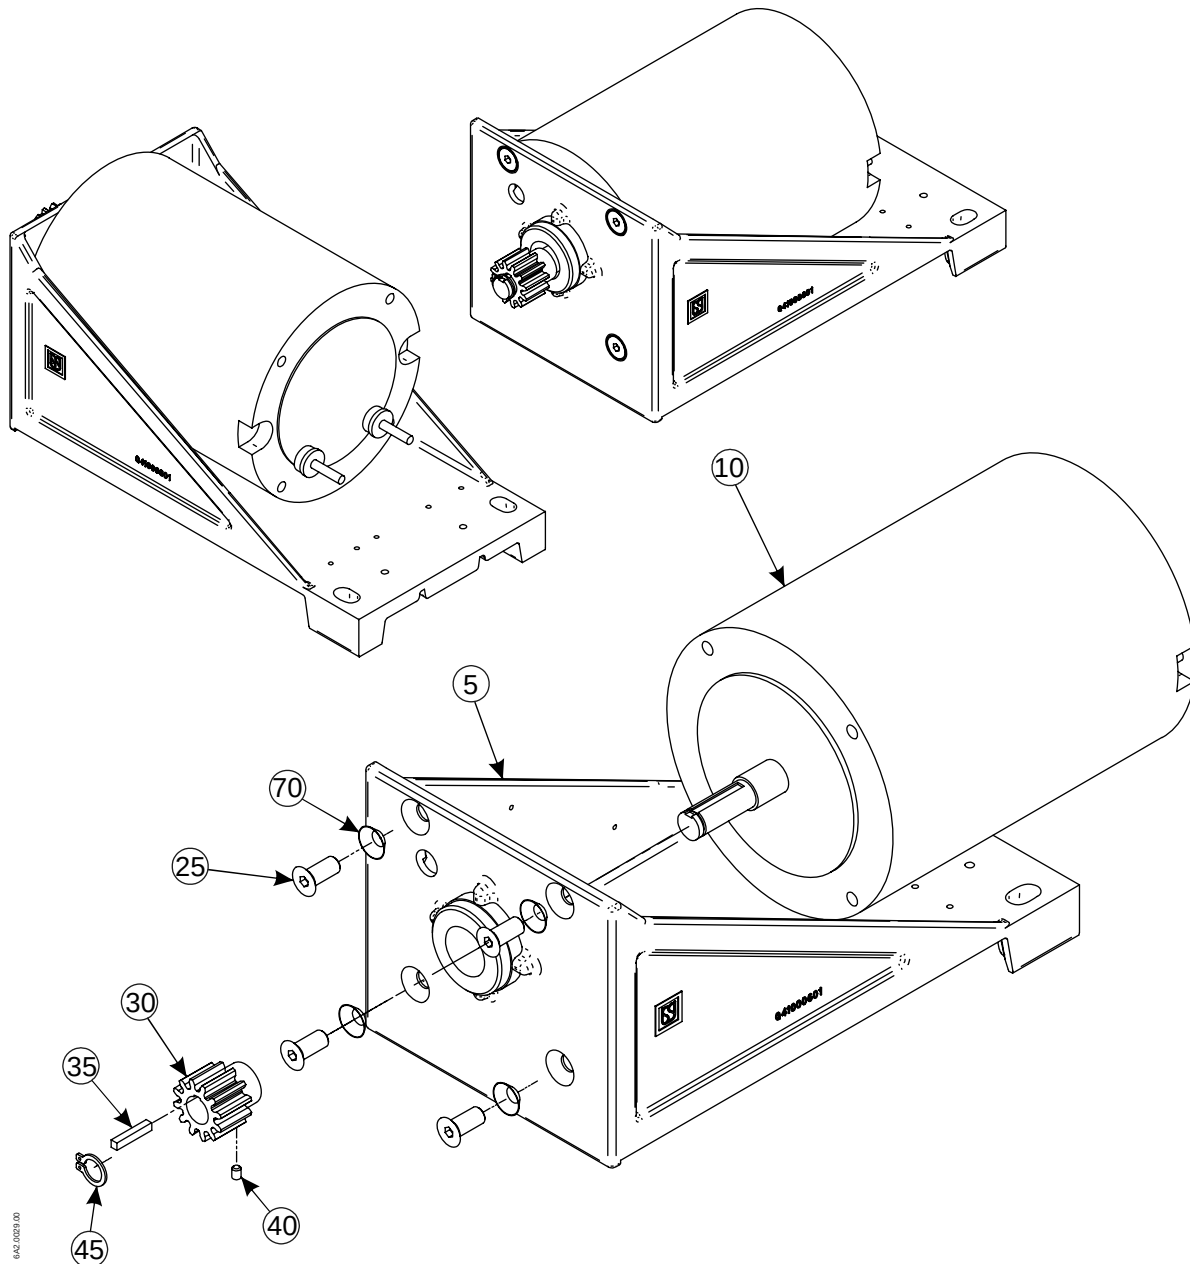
Motor (Black) Assembly (N422008-xx) Parts Location
